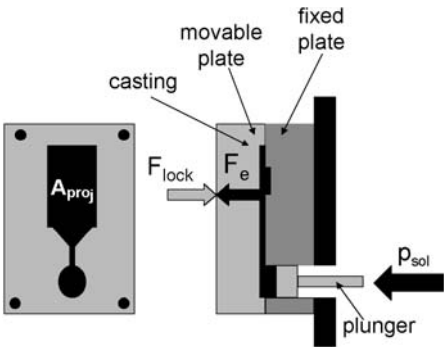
Calculation of the necessary locking force of the pressure die casting machine
